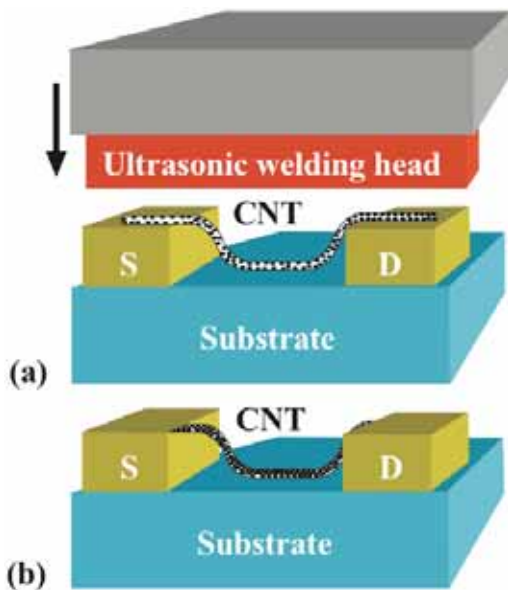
Schematics of the ultrasonic nanowelding process. (a) before welding; (b) after welding. Images adapted from reference [15].
